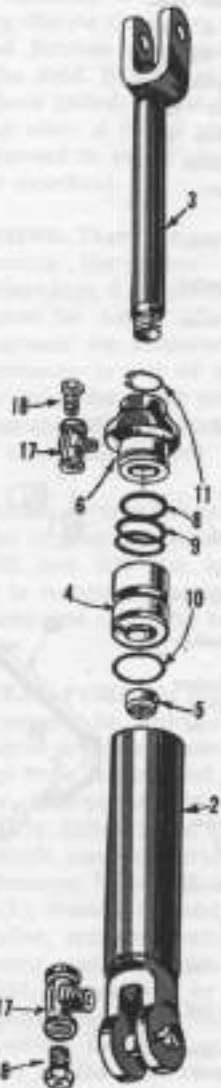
Exploded view of one type of Massey-Harris pull behind cylinder.
